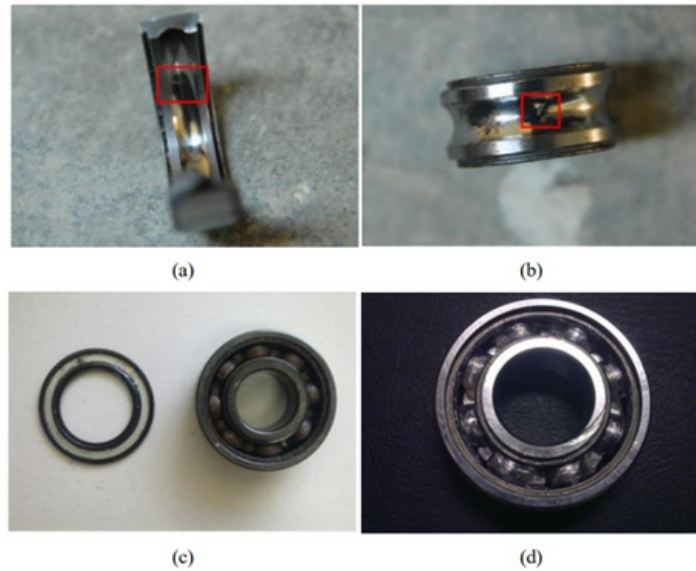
(a) Outer race defect (b) Point defect (c) Corroded (d) Healthy bearing
